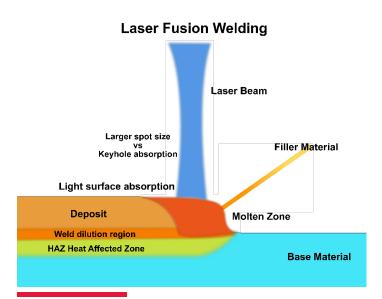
Larger spot size- Laser conduction mode welding with filler or cladding
